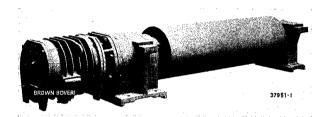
Roller of Sack type with built-on Brown Boveri motor.
